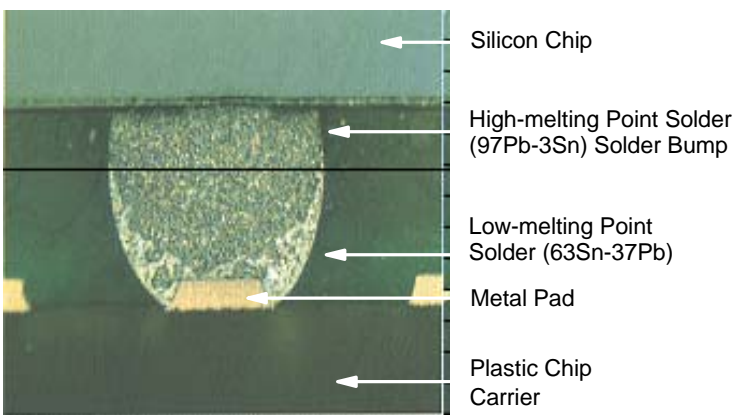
Vertical Cross Section of a high-melting temperature Flip Chip solder bump (97Pb-3Sn) attached to a metal pad on a Plastic Chip Carrier with low-melting point solder (63Sn-37Pb).
